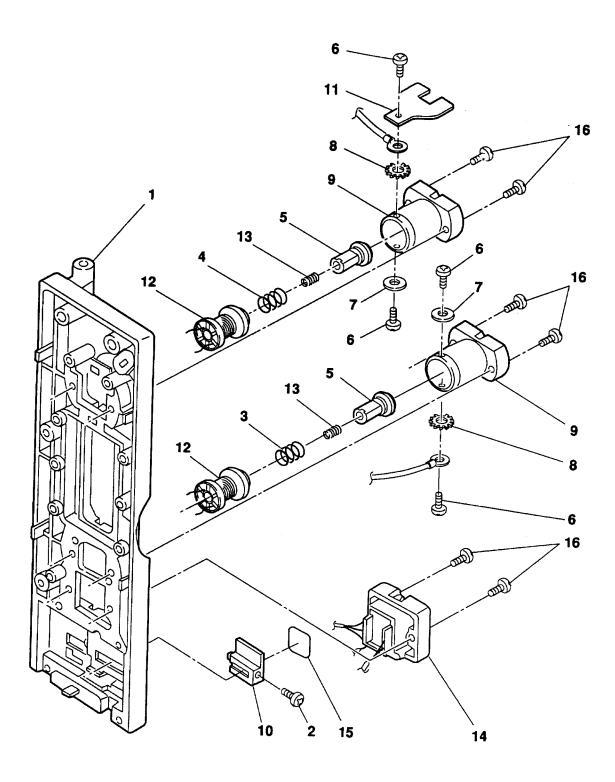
Pump 1 Base Plate Assembly - Rear
